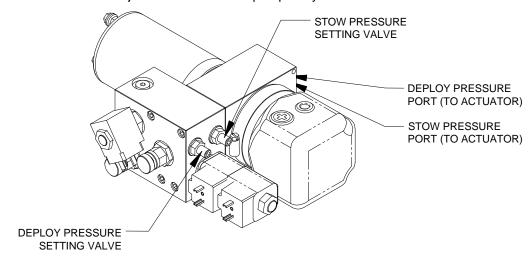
HYDRAULIC PUMP ASSEMBLY
